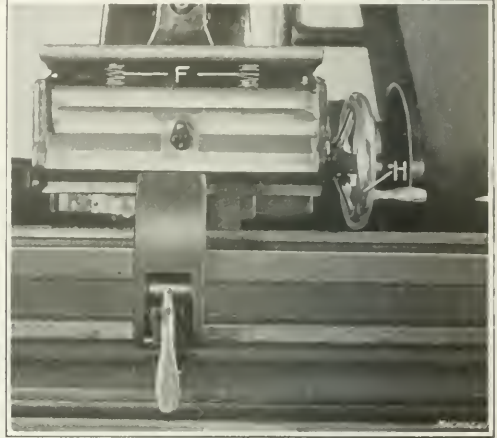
Cam-controlled Device designed for forming Irregular Shapes on Face of Grinding Wheel on Norton Plain Grinding Machines
